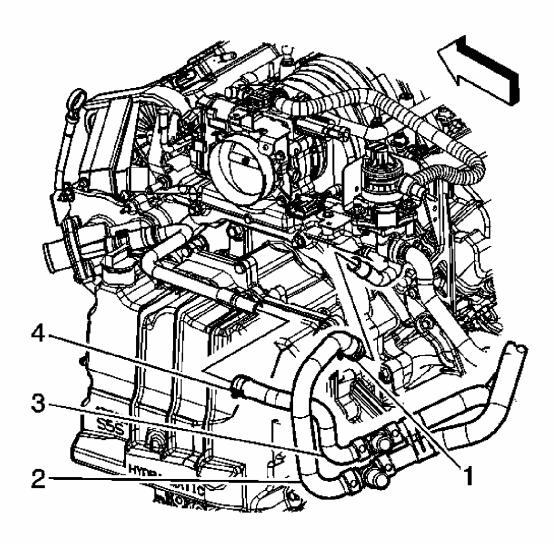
Identifying Heater Inlet & Outlet Hoses Courtesy of GENERAL MOTORS CORP.
